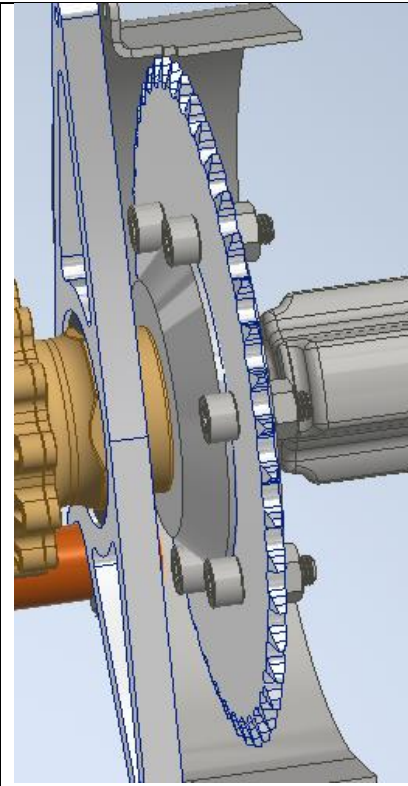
ARG23 Rear Sprocket Setup Driver's Right
